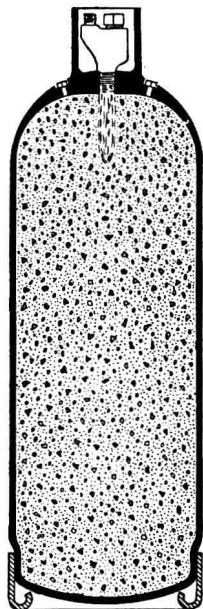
(Left) This type of acetylene cylinder is made with a heavy neck at the top welded to the shell. The bottom is also pressed into position, and welded, and the base ring is shrunk onto the shell. The filling material is quite different, consisting of a layer of long fibre asbestos at the top of the cylinder, fine asbestos at the bottom of the cylinder, and the intermediate space filled with a mixture of Balsa wood and infusorial earth, which is essentially silica. This produces a very porous filler. The valve at the top of the cylinder is protected by a cap as indicated. Fuse plugs are placed at the bottom and top of the cylinder. All fuse plugs in acetylene cylinders are bolts having holes drilled through them which are filled with a low fusing point metal. In the event of fire adjacent the cylinder, heat of approximately 250 degrees will cause the fusible metal to melt and release the gas.
